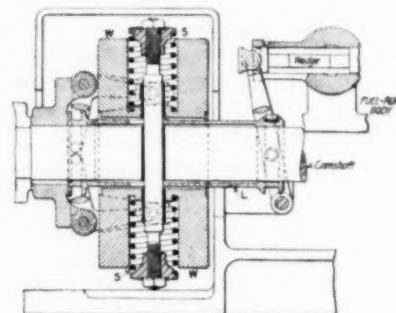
GOVERNOR AND PARTS OF FUEL VALVE OF THE McEWEN ENGINE
